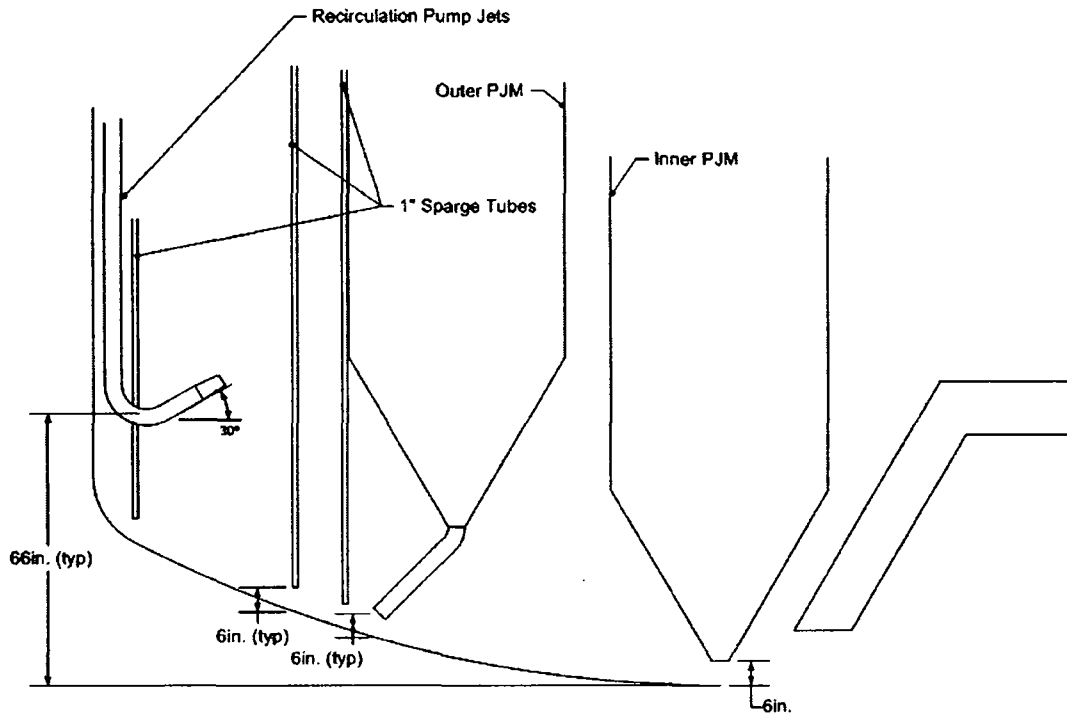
HLP-VSL-00027A/B Mixing System Layout – Elevation View
